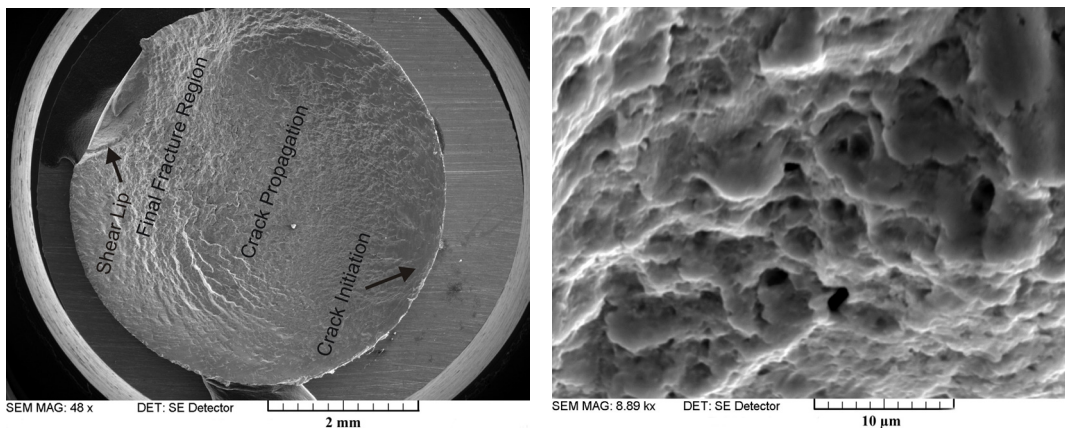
Typical SEM micrographs of the base metal + pretreatment, tested at 475 MPa, a) Fatigue fracture surface and b) Final fracture region.
